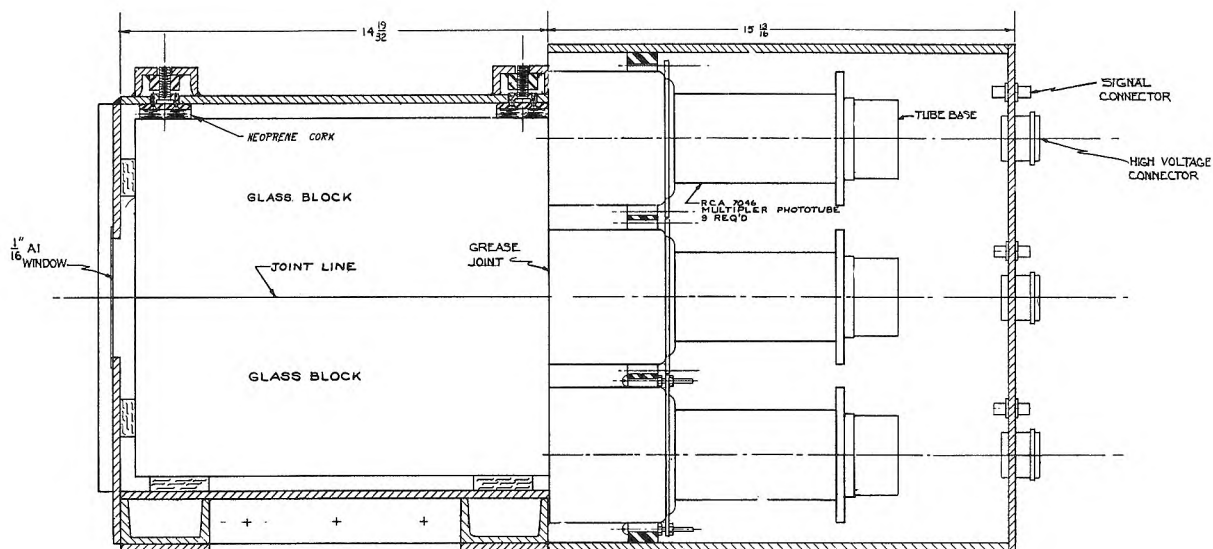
Cerenkov counter assembly showing details of construction and phototube mounting.
